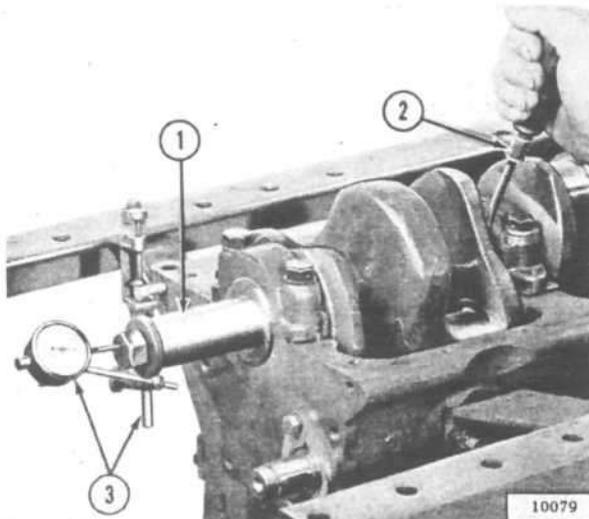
CHECKING CRANKSHAFT END-PLAY
